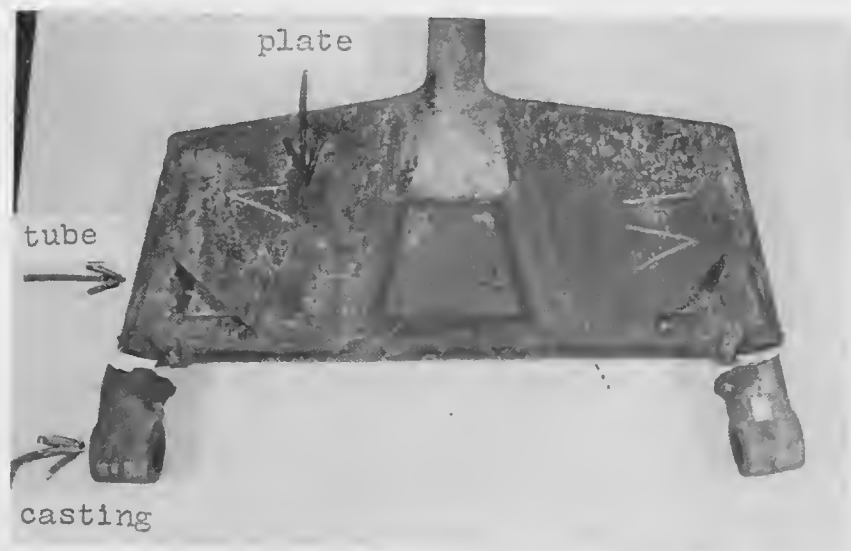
Overall view of drawbar showing the component plates, tubes, and castings welded together. The two failed castings are shown in approximately their respective locations.
